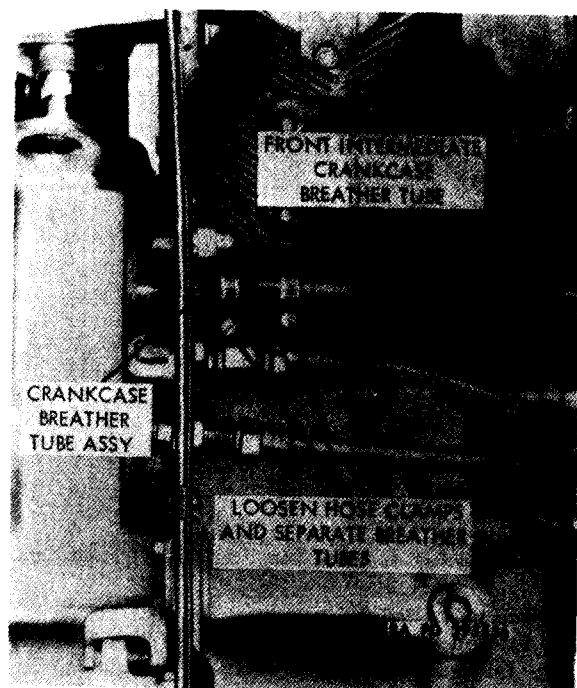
Disconnecting or connecting crankcase breather tube at front of engine.
